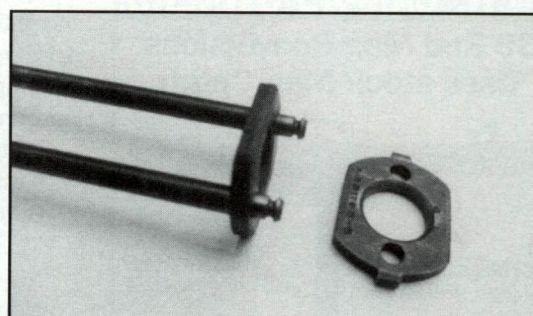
The guide rod assembly with two guide rod plates and snap ring installed.
